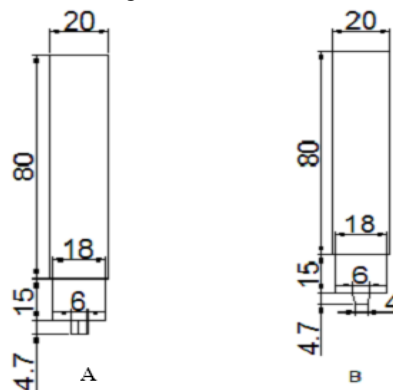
Tool Dimensions (A) With Hexagonal Pin (B) With Pin as Conical (frustum) & Conical with Flutes at 90°
